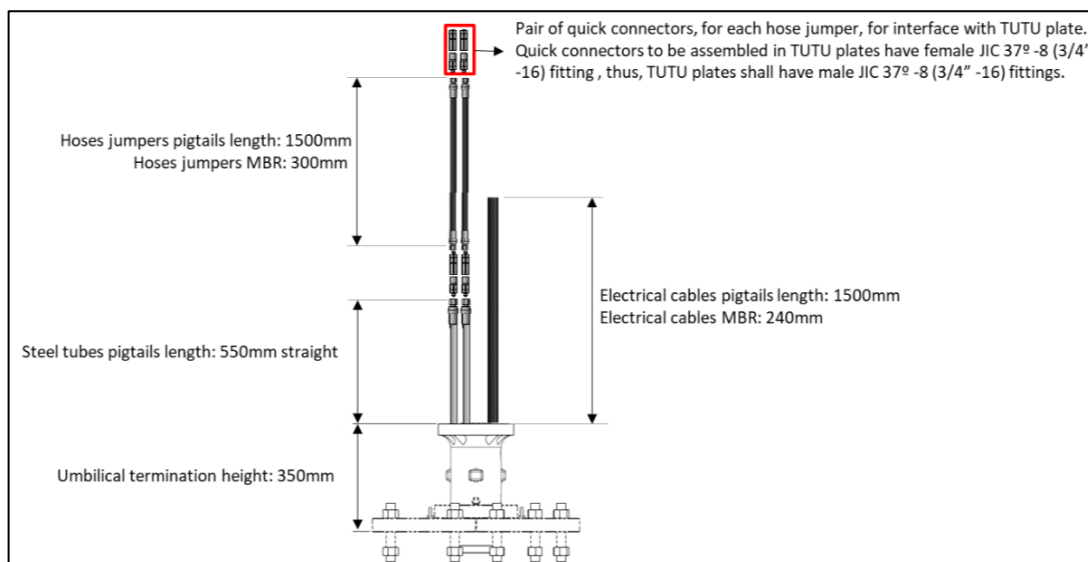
Typical arrangement for *pigtails* of STU Umbilical Risers
